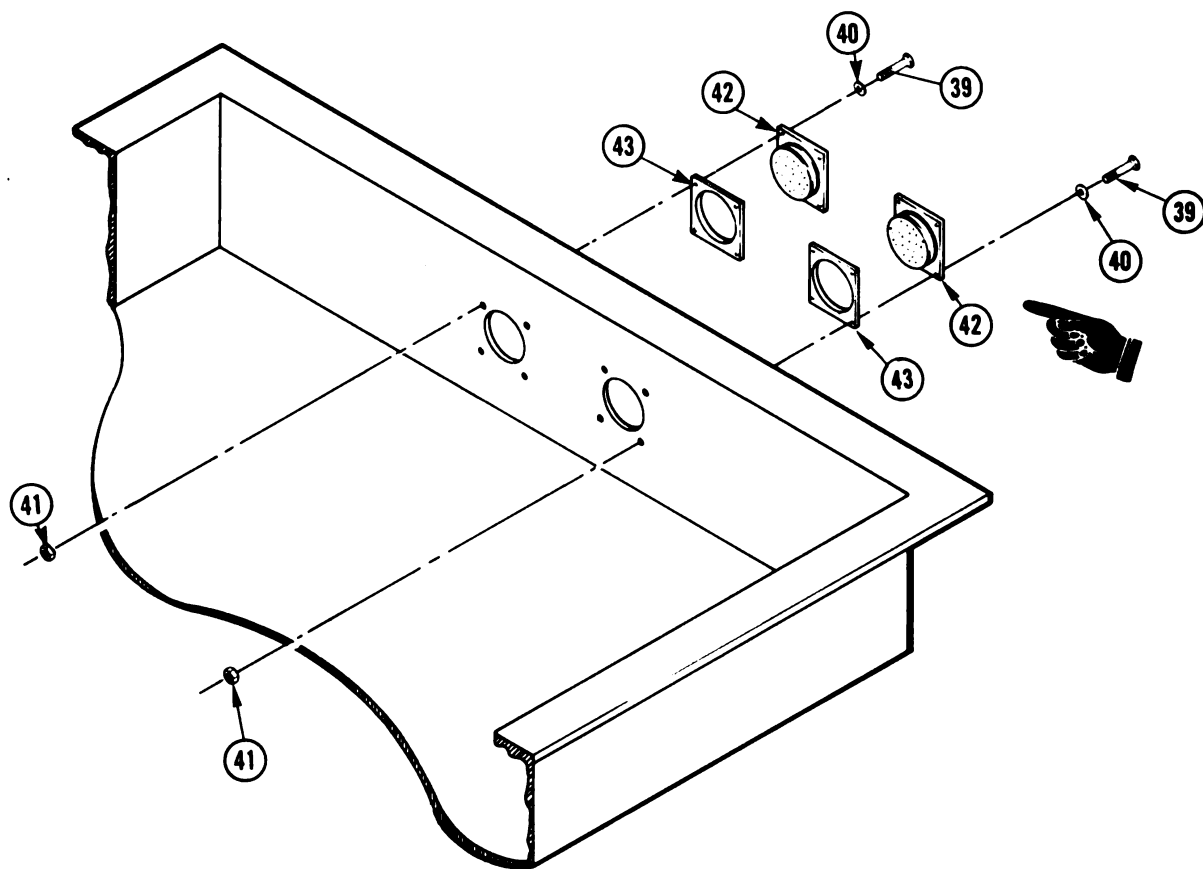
Wiring Harnesses and Cables (Sheet 5 of 10)
